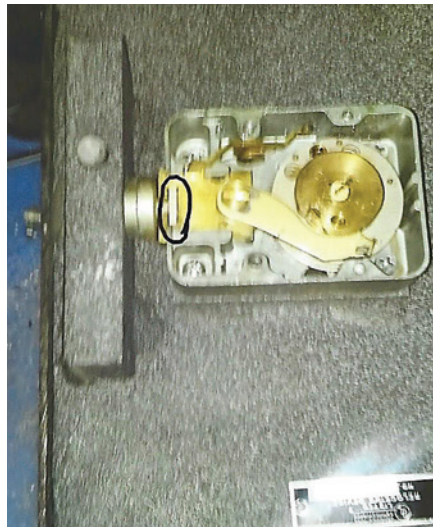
The bolt connector, circled, prevents the lock bolt from fully retracting.
